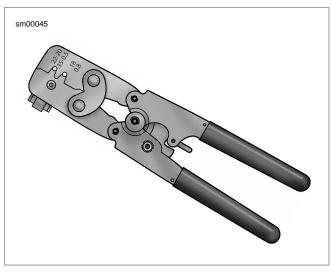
Packard Micro 64 Terminal Crimper (HD-45929)
